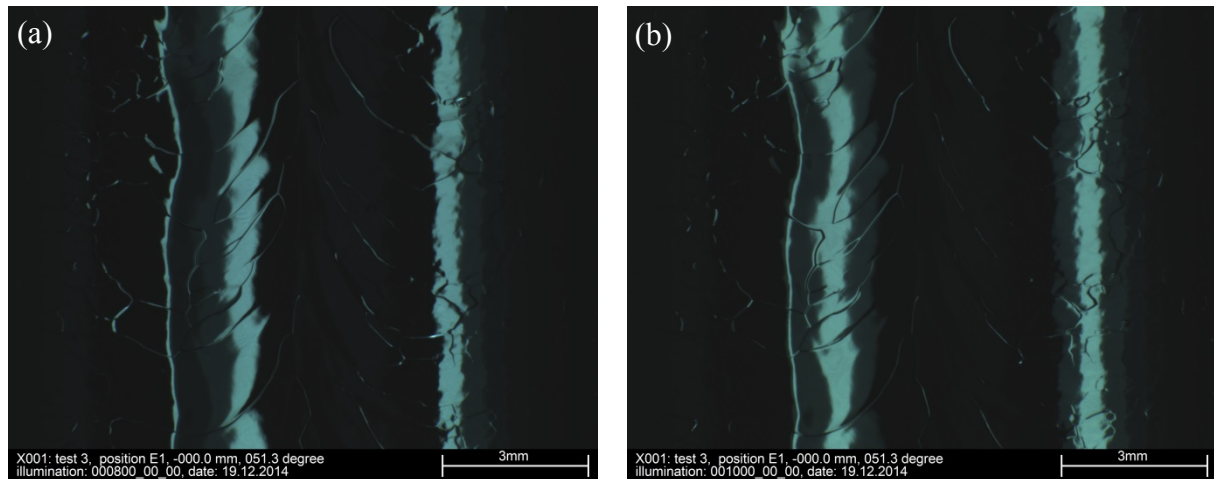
Welding seam lit with a) strip LED # -1 and b) strip LED # -2. In b) both bright bands have moved towards the edges of the image.
